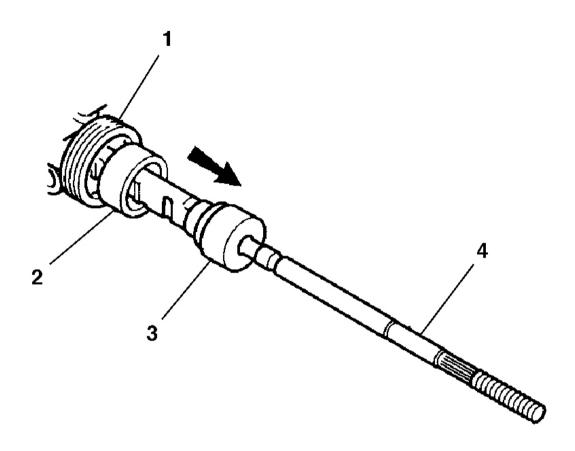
Shock Dampener & Inner Tie Rod Housing Courtesy of GENERAL MOTORS CORP.
